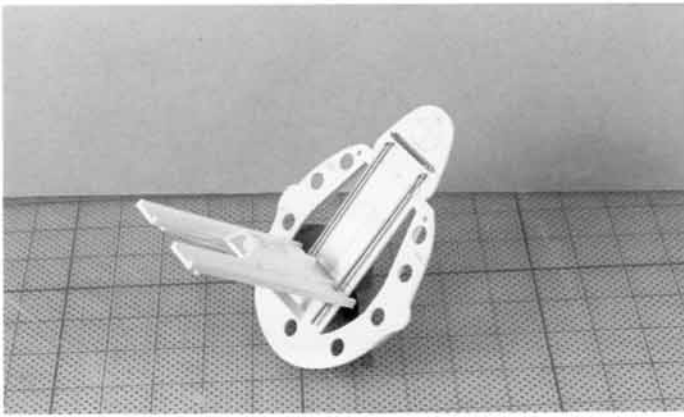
The seat tube framing is getting one last fit check. At this point the cockpit interior is starting to take shape.
